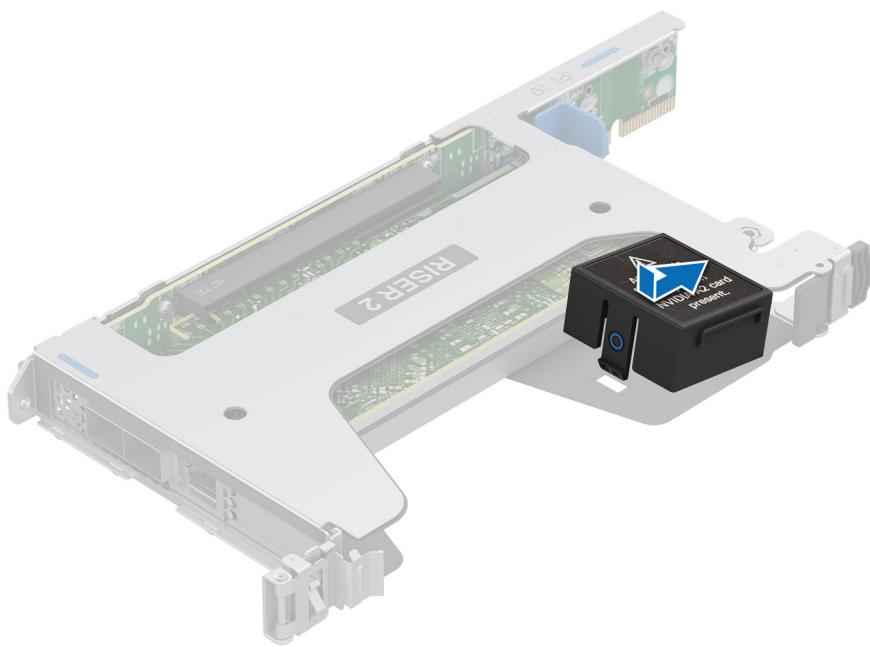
Installing GPU blank on the rear expansion card riser 2q
